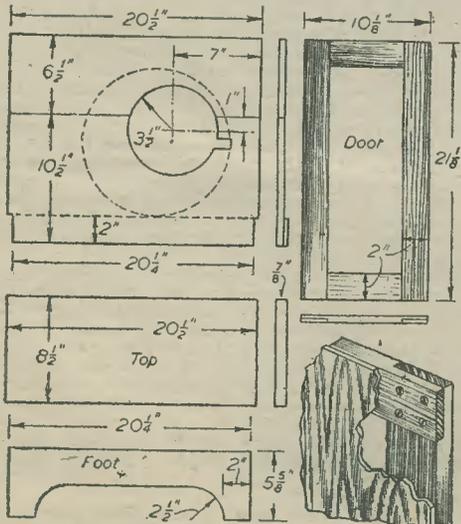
Size and shape of motor-board, top, foot and door-frame, with details of the door construction.
